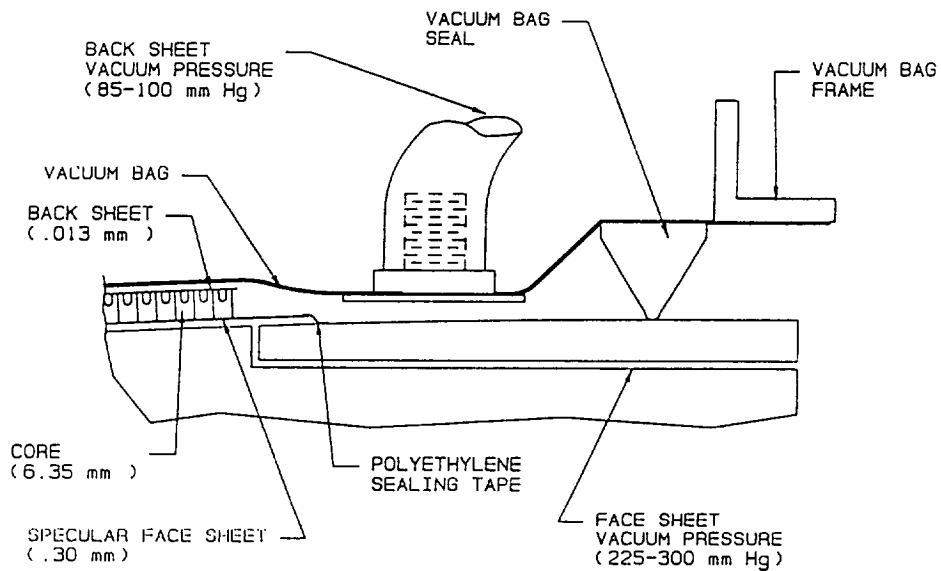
Cross Section of Facet on Mold with Vacuum Bag.
